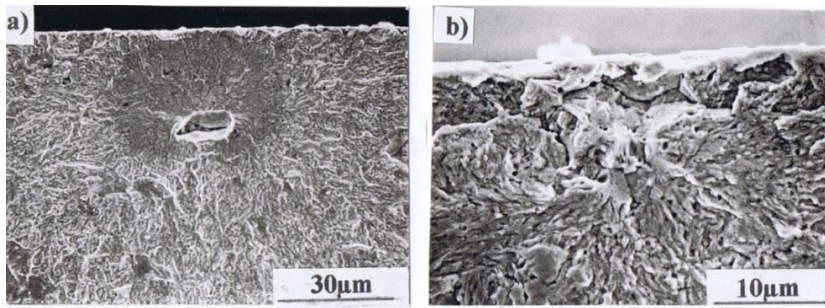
Subsurface fatigue crack initiation of 13Cr-1Mo steel in air.
